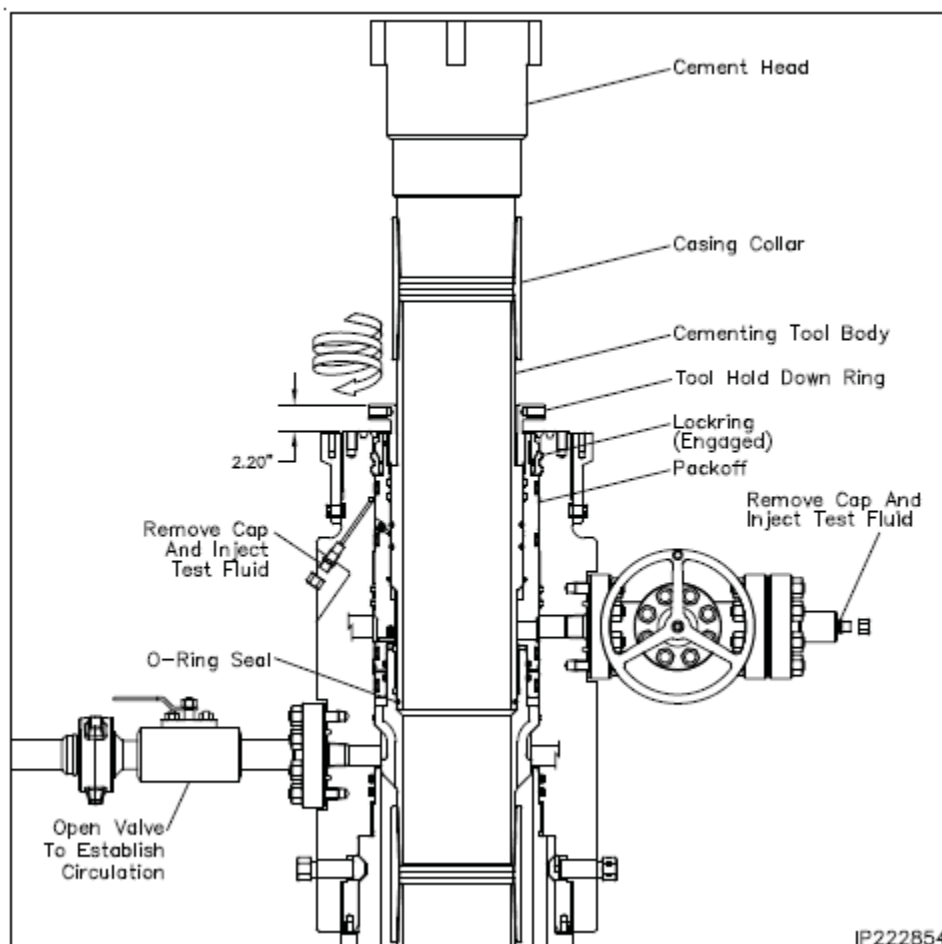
Cactus 9 5/8" 5M offline cementing tool. Pressure rating limited by the lesser of 5M tool rating or the 9 5/8" pup joint and casing.
